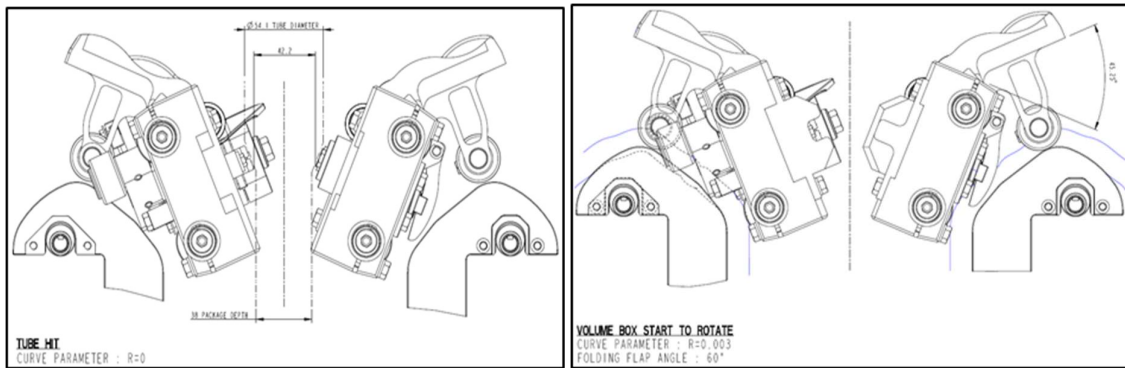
Tube Hit (left), Contact Volume Cam and Ball Bearing (right)
